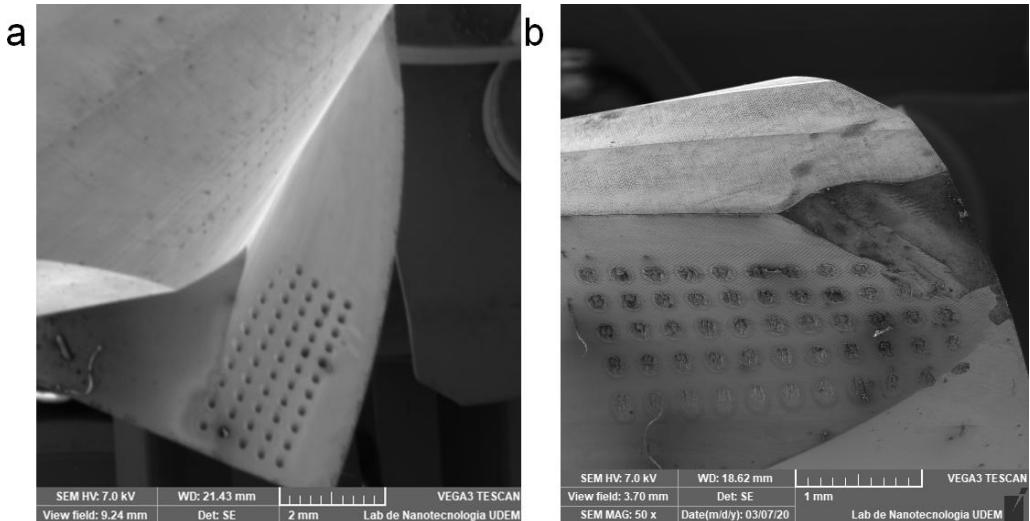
Image of an endmill with dimple type texturing (a) before and (b) after the machining experiments showing signs of fractures.
